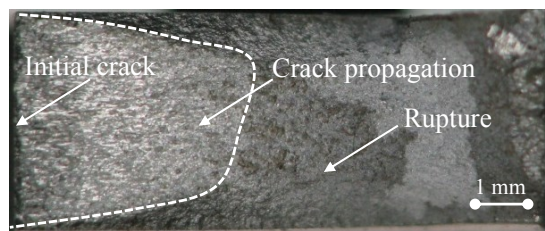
Fracture surface of the fretting fatigue specimen FF9.
